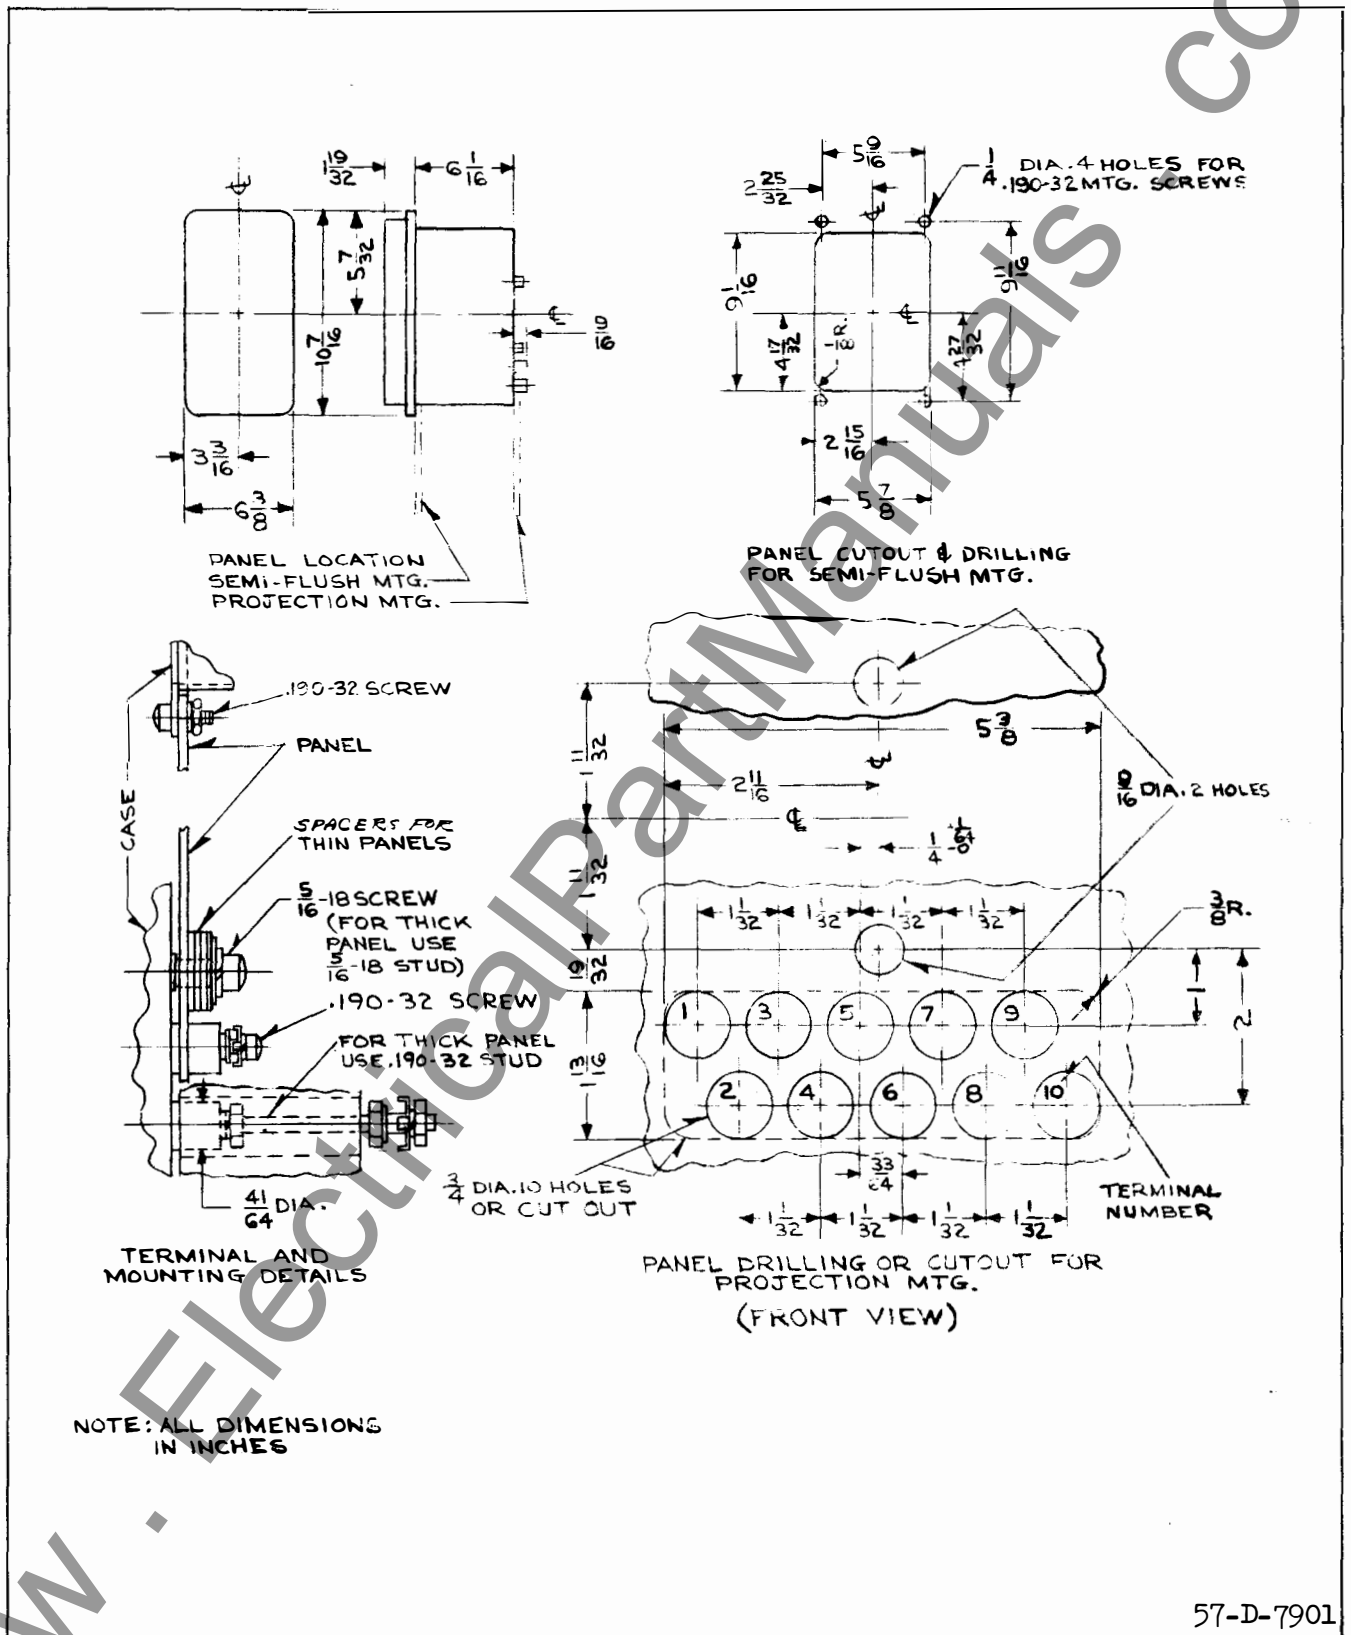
Outline and drilling for the type CA generator relay in the type FT21 Case.
